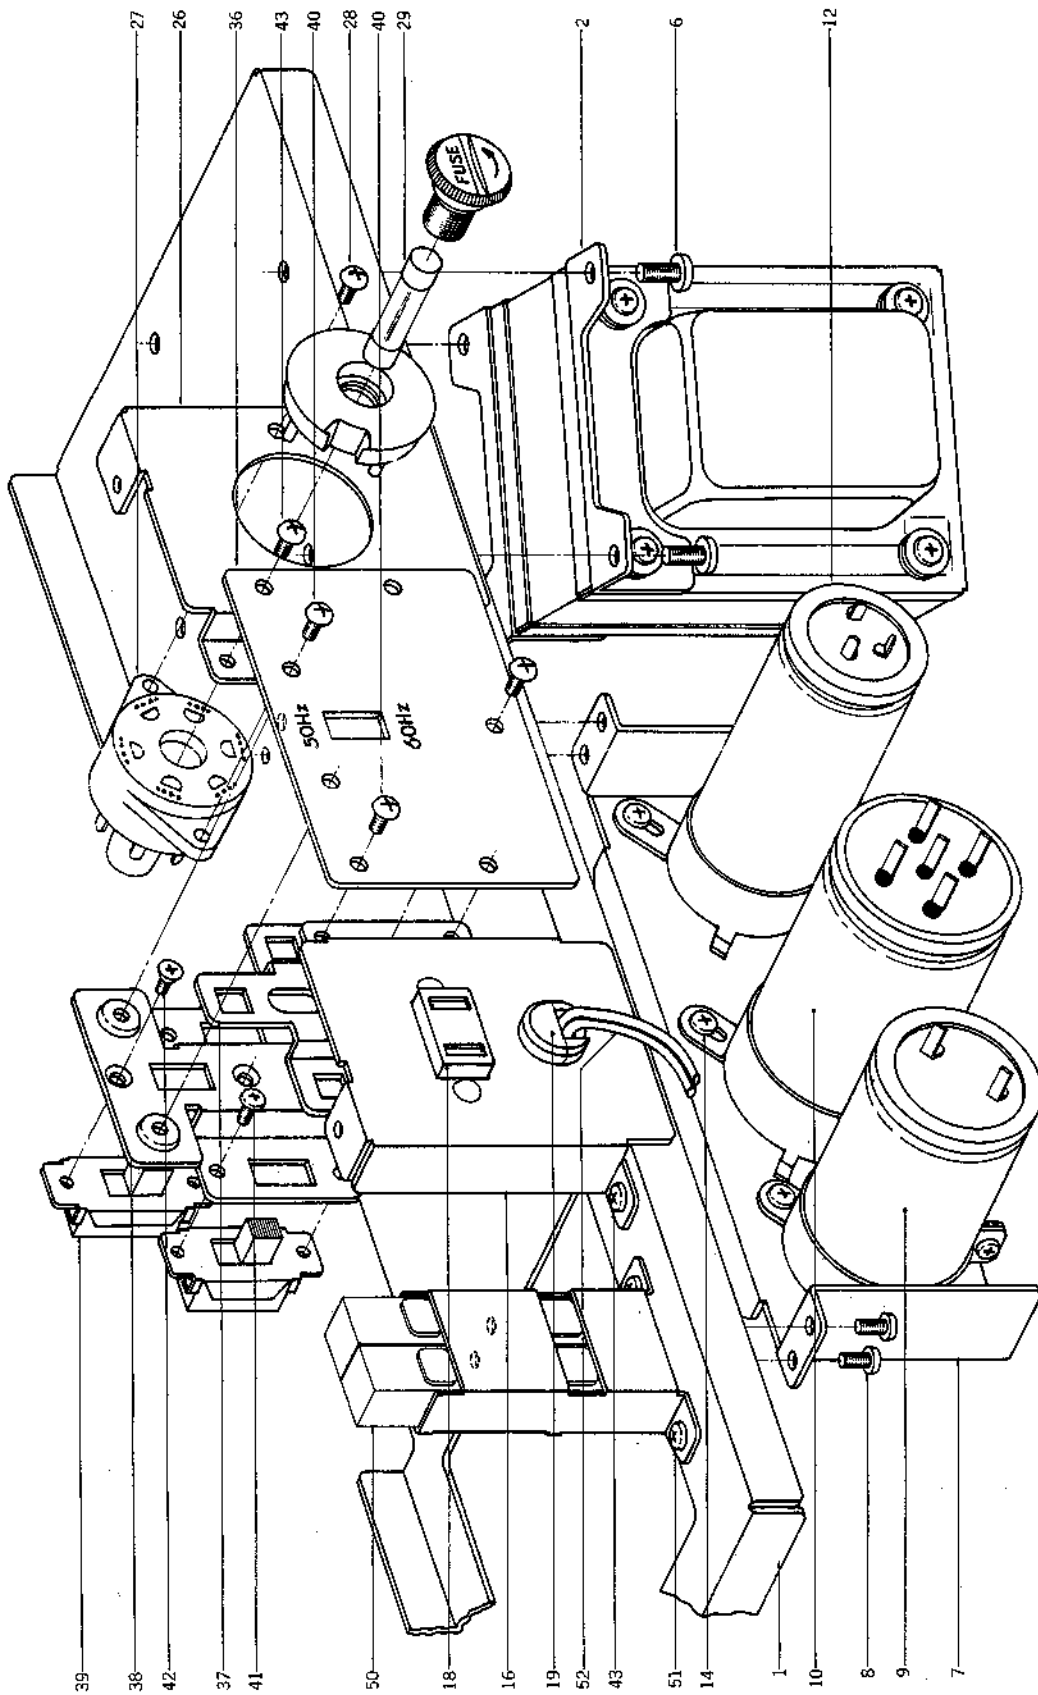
ILLUSTRATION OF MECHANISM ASSEMBLY BLOCK
